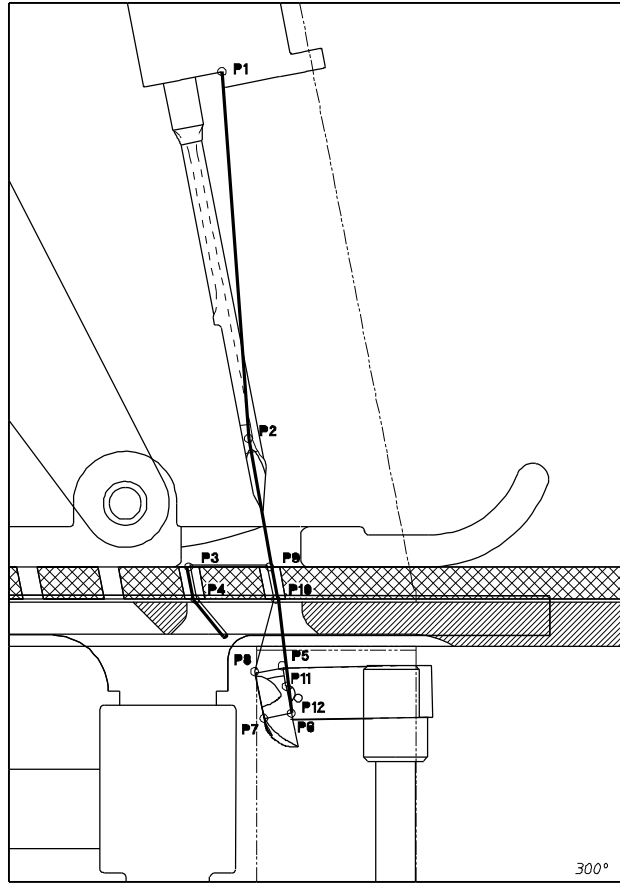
Needle thread passage at a double chain stitch sewing machine
